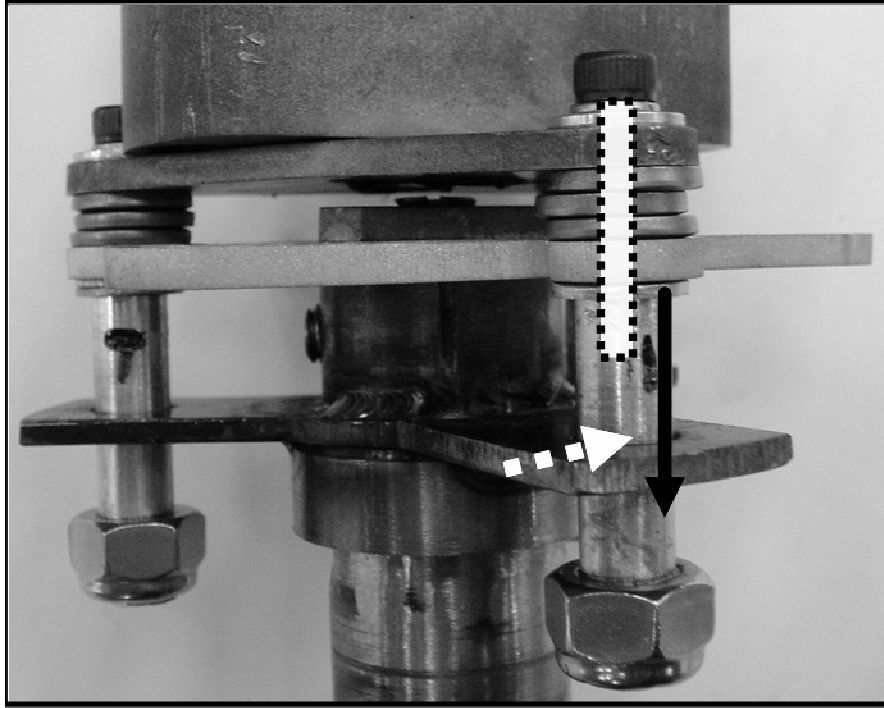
Enlargement of Stop Engagement Sub-Assembly
